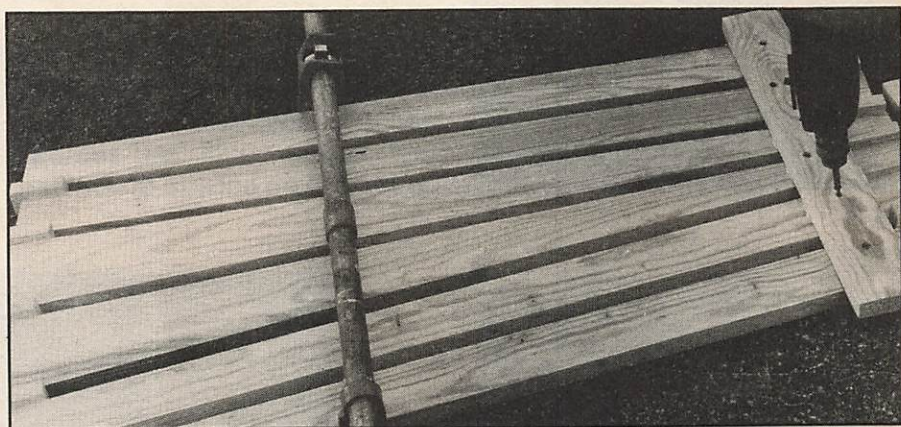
Secure back parts with cross member. Note: spacer blocks at each end are clamped in place with furniture clamp.
